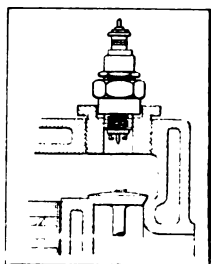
Illustrating a spark plug which is too short to reach into the combustion space
